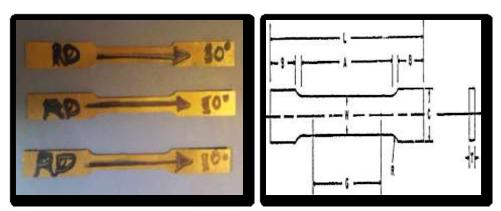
Rectangular cross section tensile test specimen, ASTM E8-M.[7]
